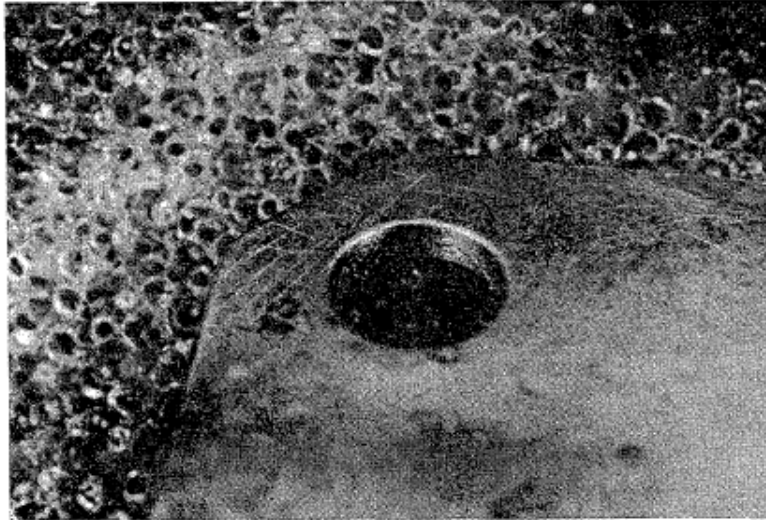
Small Hole Edge Deburred with a Rubber Bullet
